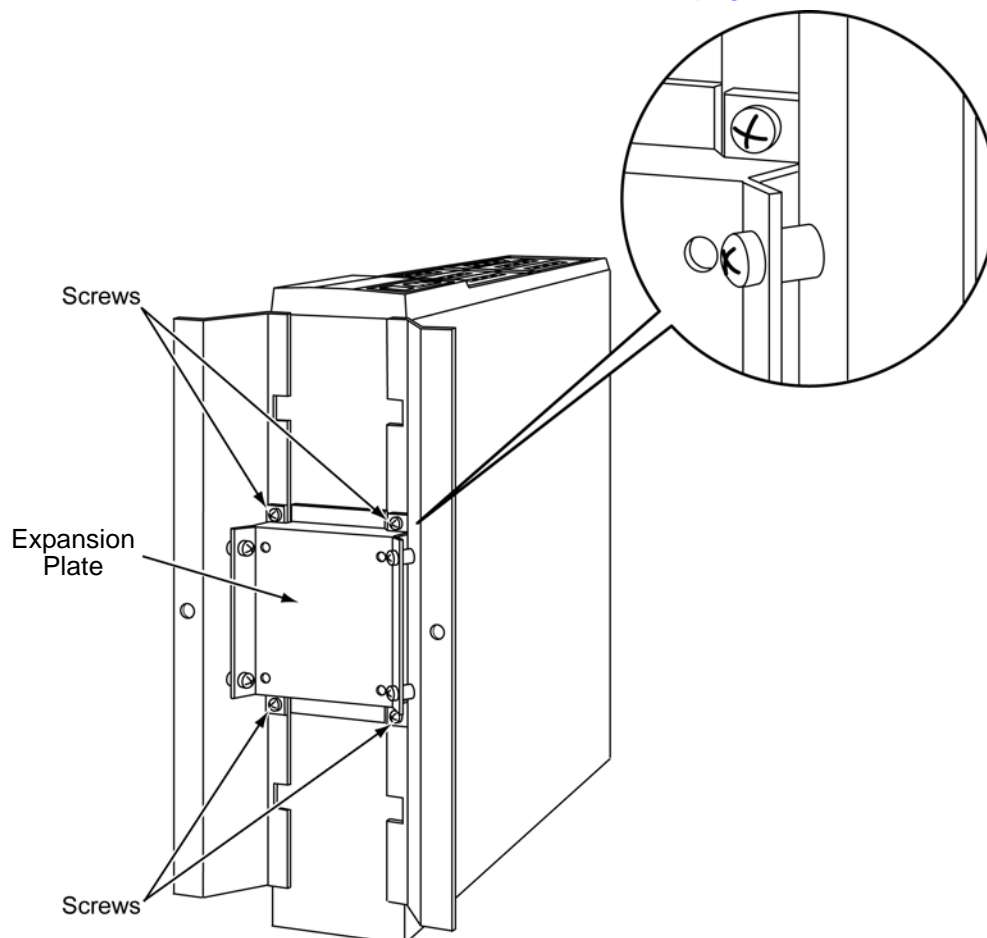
Secure CHS2U-AU Chassis to CHS2U STAND KIT with Screws
